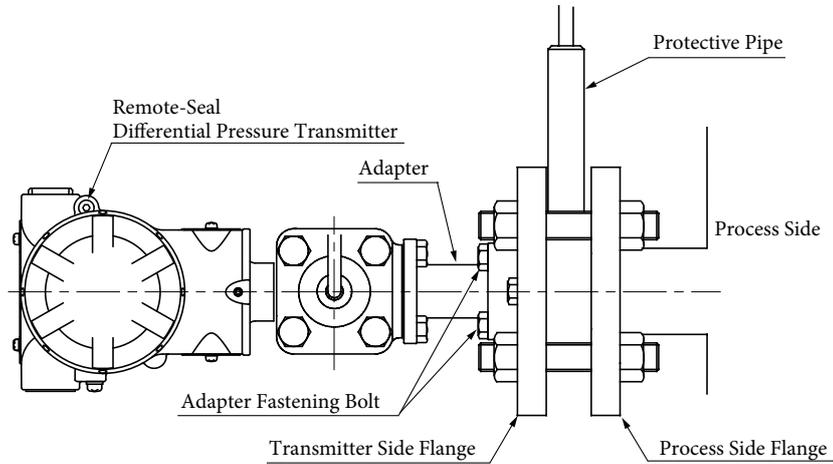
Adapter Assembly Diagram (for GTX__R)
